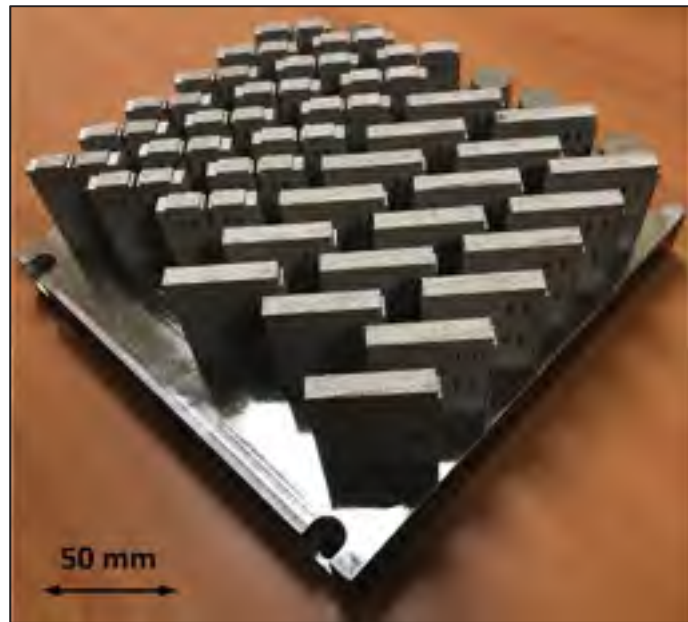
a) Image of the build plate with 0° and 90° blanks for fatigue crack propagation testing
